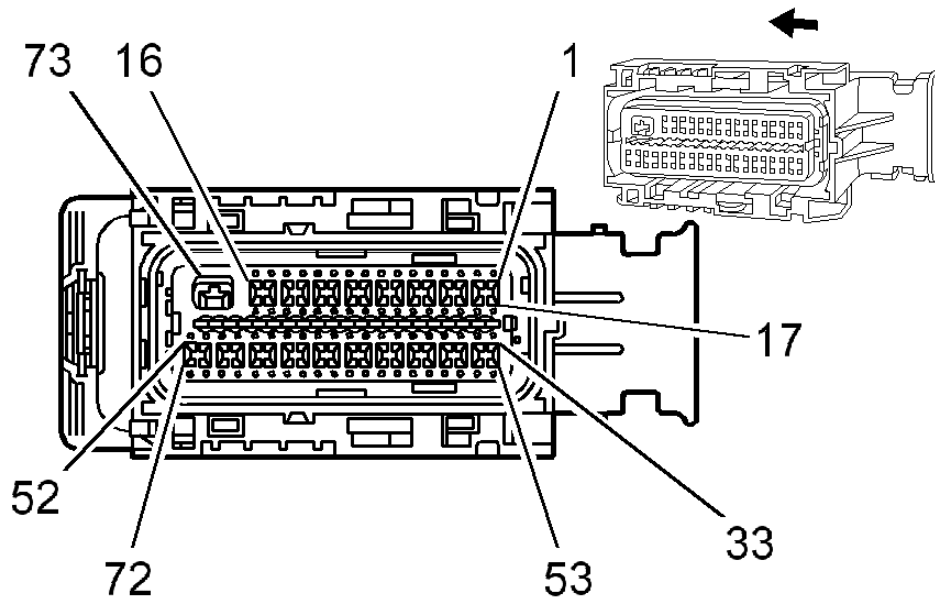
Engine Control Module (ECM) X1 (L61/LE5) Connector End View
